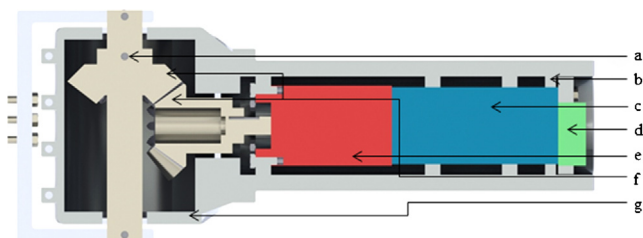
Modular component with architecture details. (a) Gear shaft, (b) motor casing, (c) motor, (d) encoder, (e) reduction gearbox, (f) bevel gears.
